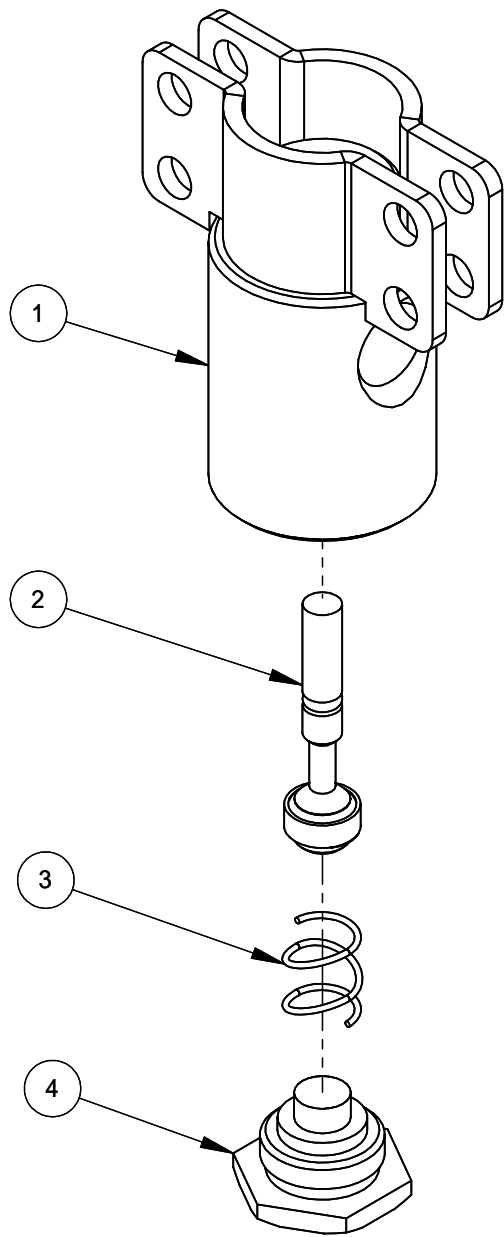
Upper and Lower Handle Assembly -View 3 of 3
